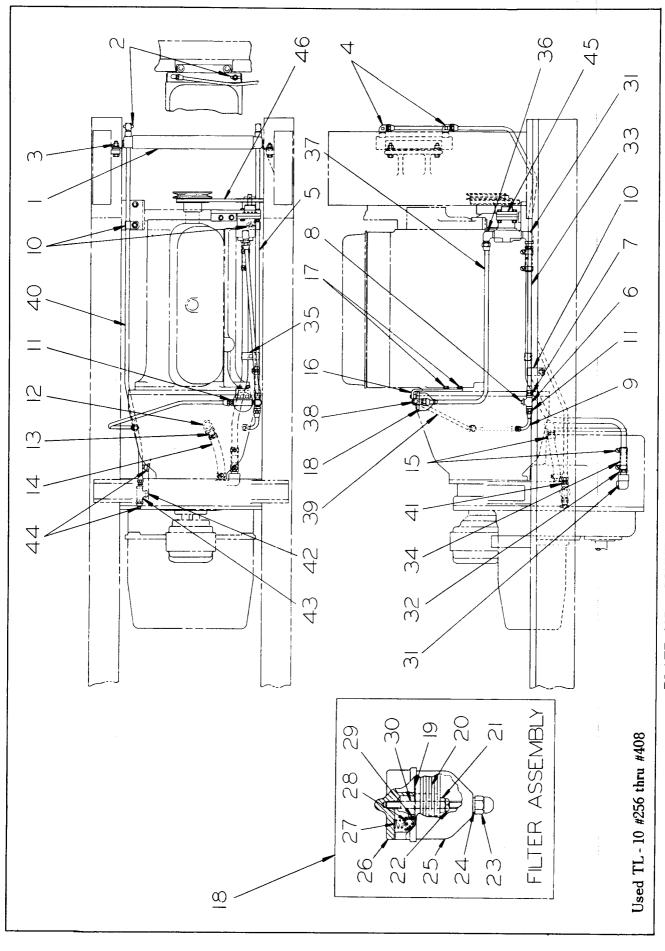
CONVERTER RADIATOR AND COOLING SYSTEM
